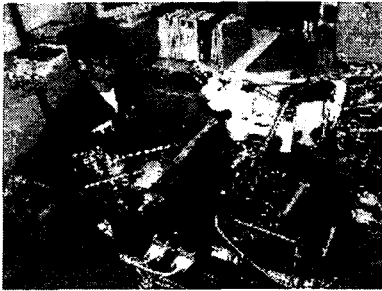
Micro-welding system<sup>(10)</sup>
